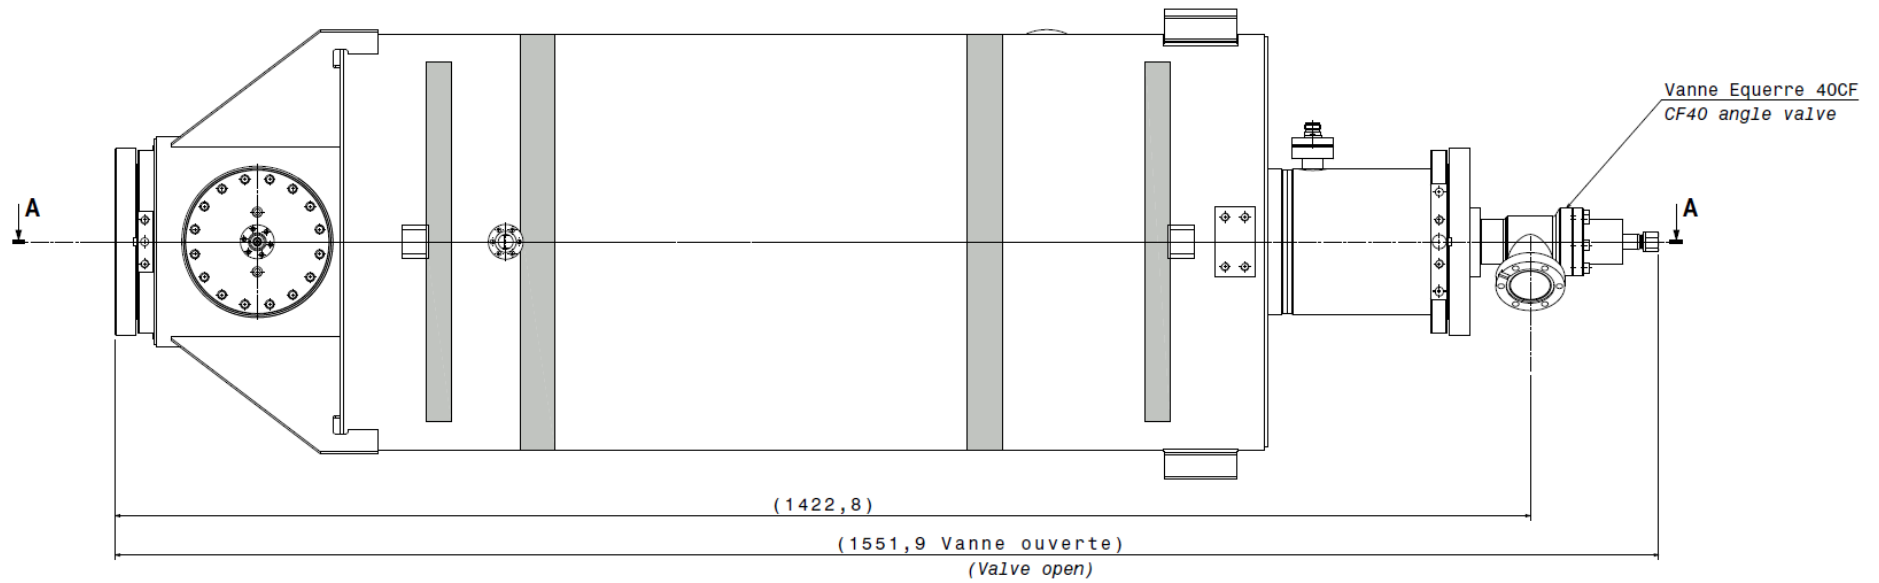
View of the 'dressed' cavity with flanges and vacuum valve attached.
